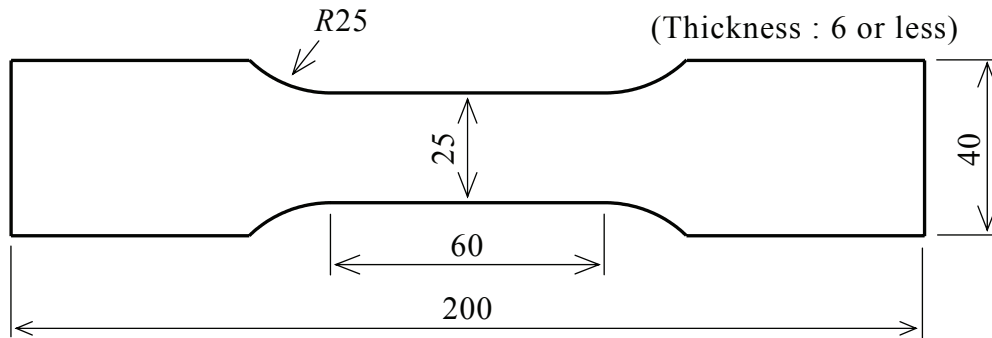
Shape and dimension of JIS No.5 tensile specimen (unit : mm).
